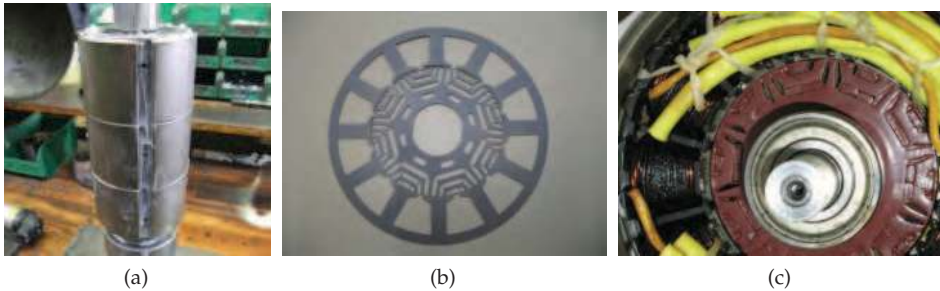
PM machine prototypes: (a) an SPM rotor, (b) and (c) IPM machine laminations.
